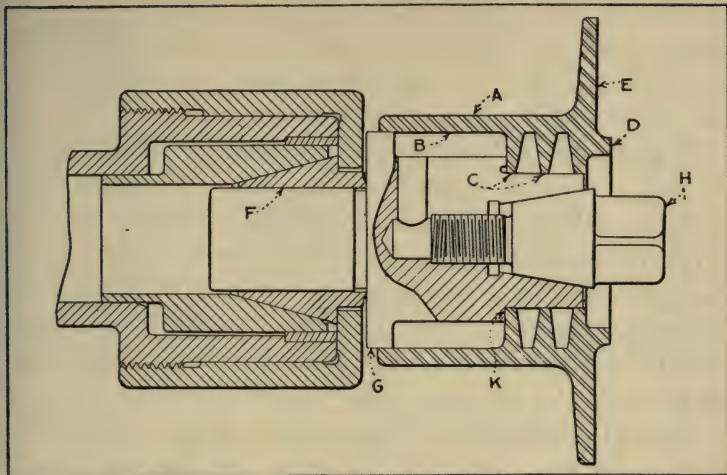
SECTION THROUGH EXPANDING ARBOR FOR AN AUTOMOBILE FLANGE
